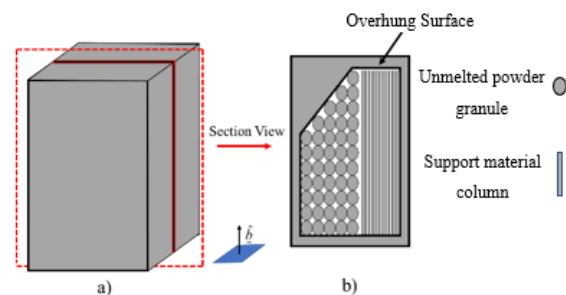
Hollow rectangular prism. (a) Iso-metric view, build vector shown in bottom right corner. (b) Section view of (a).
